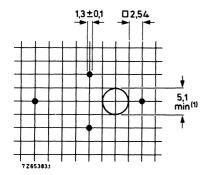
Hole pattern for mounting on a printed-wiring board.
